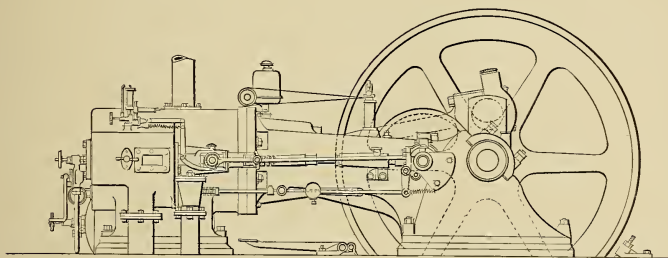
FIELDING'S GAS ENGINE. SIDE ELEVATION.
